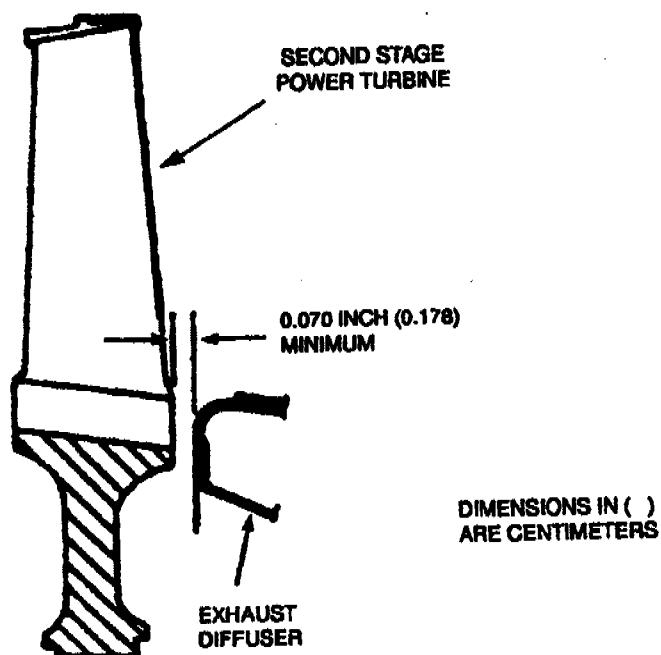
Clearance Between Exhaust Diffuser Cone and Second Stage Power Turbine Rotor.
